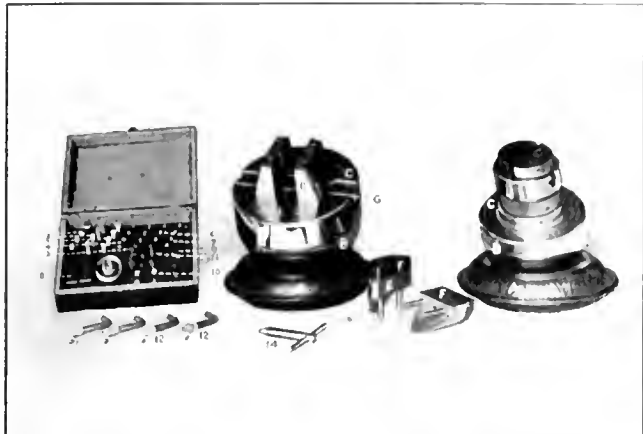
Regular and Keyless Engraving Blocks and Attachments
